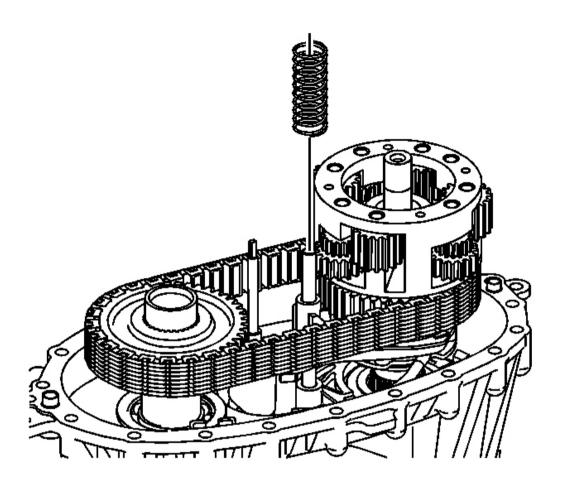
Shift Fork Shaft Spring Courtesy of GENERAL MOTORS CORP.
